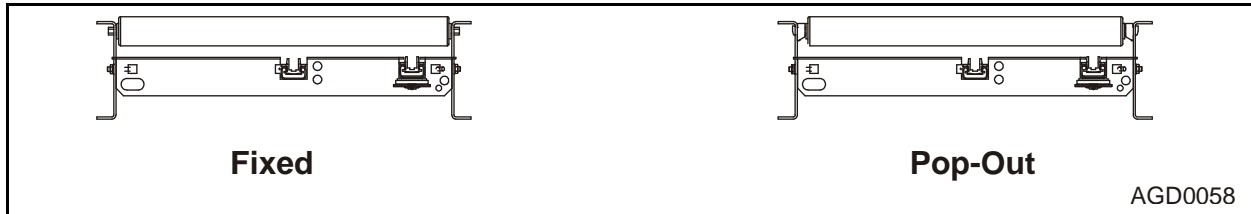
8 Pop-Out Carrier Roller Mounting (Intermed. Straight Section ONLY)
